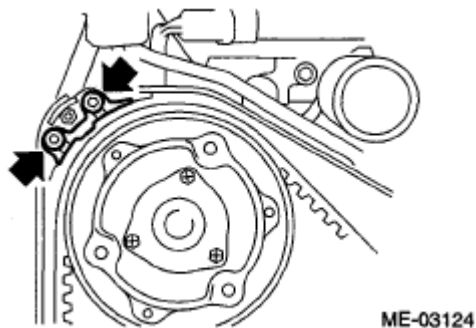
Locating Timing Belt Guide Mounting Bolts
